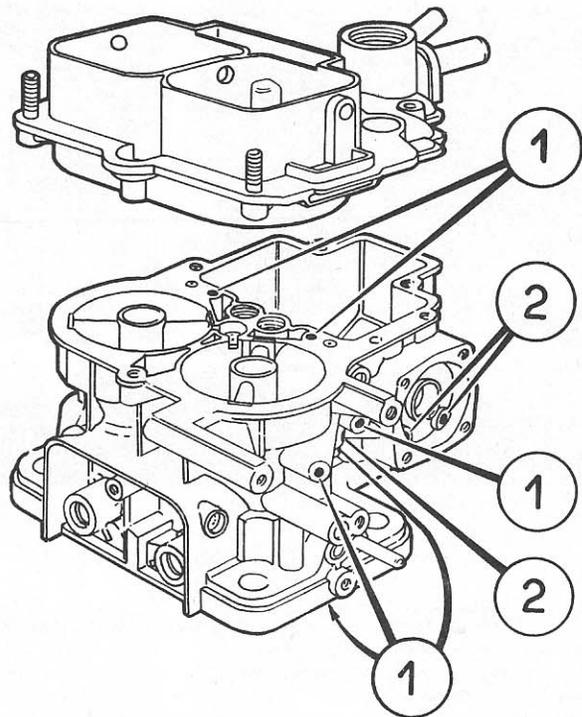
Location of the internal channels of the carburettor body (Sec 7)
